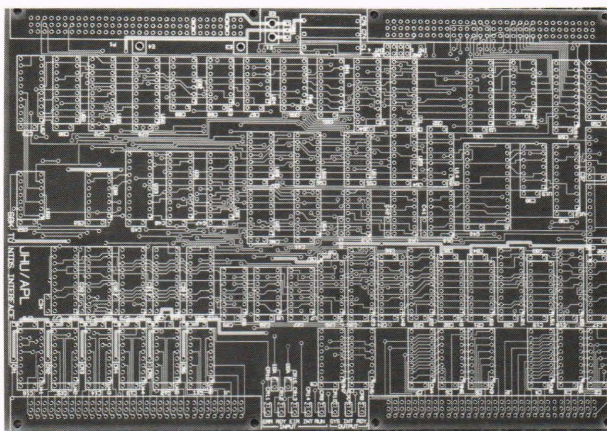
Example of a multilayer epoxy-glass printed wiring board fabricated in TEO's recently certified¹⁰ Printed Wiring Board Facility.
